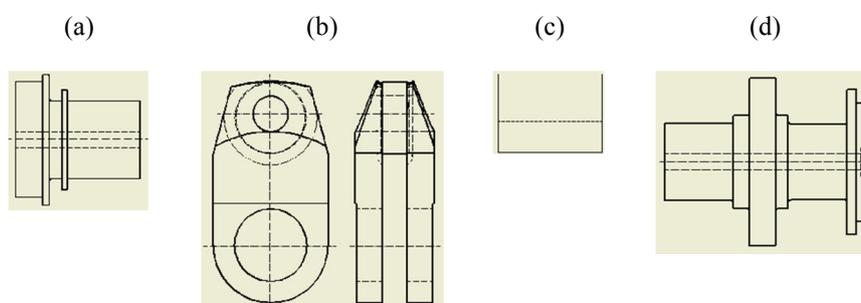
Elements of the assembled crankshaft: a) supporting journal, b) crank, c) main journal, d) journal with flange
